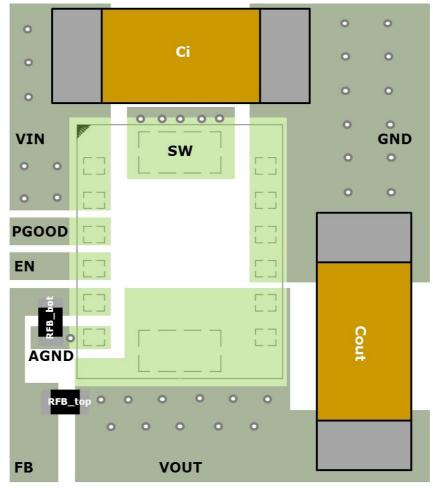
RECOMMENDATION LAYOUT (TOP LAYER)
